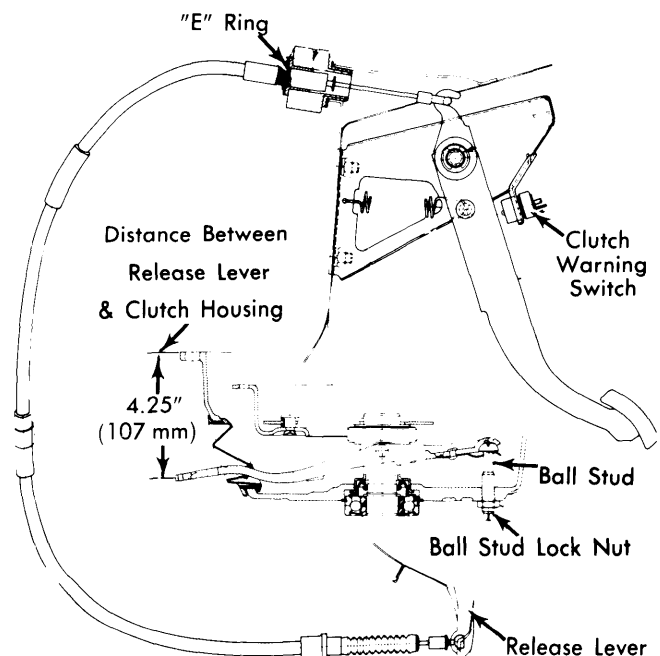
View of Clutch Actuating System Showing Adjustment Points
